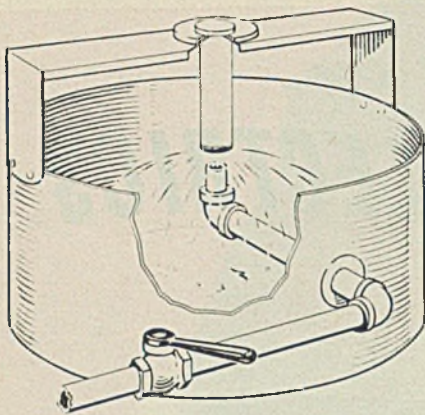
Jominy hardenability test fixture. Unit should be mounted close to furnace so sample can be transferred to quench quickly. Fixture bowl should be at least 14 inches in diameter to avoid side splash.
